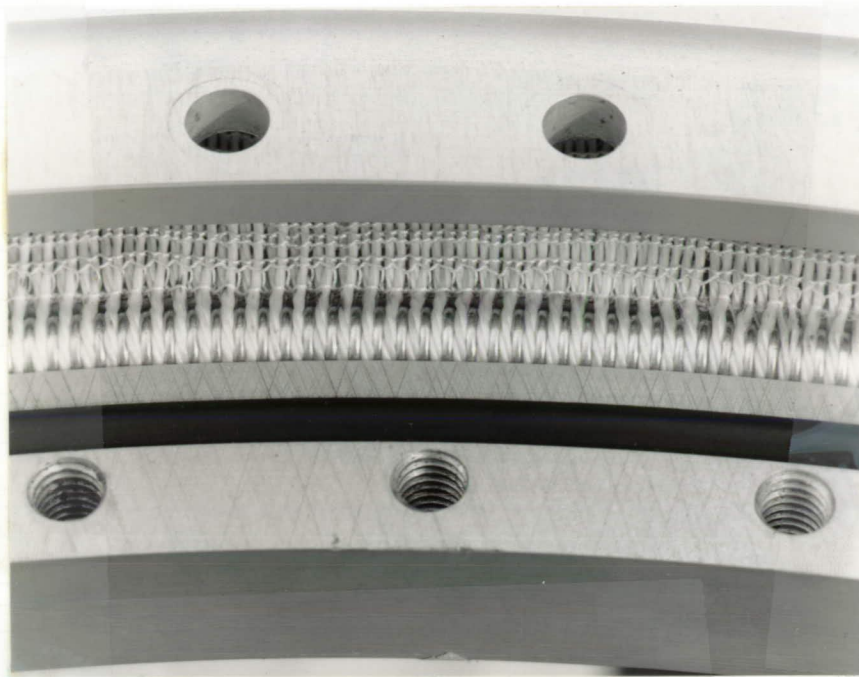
Hatch Seal and Grooved End Ring; Structural Fabric in Place
